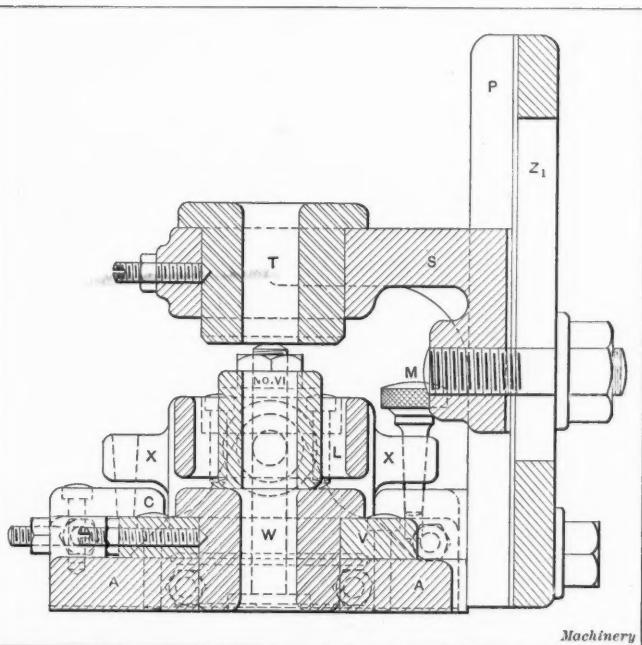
Cross-sectional View of the Universal Drill Jig on Line c-d
